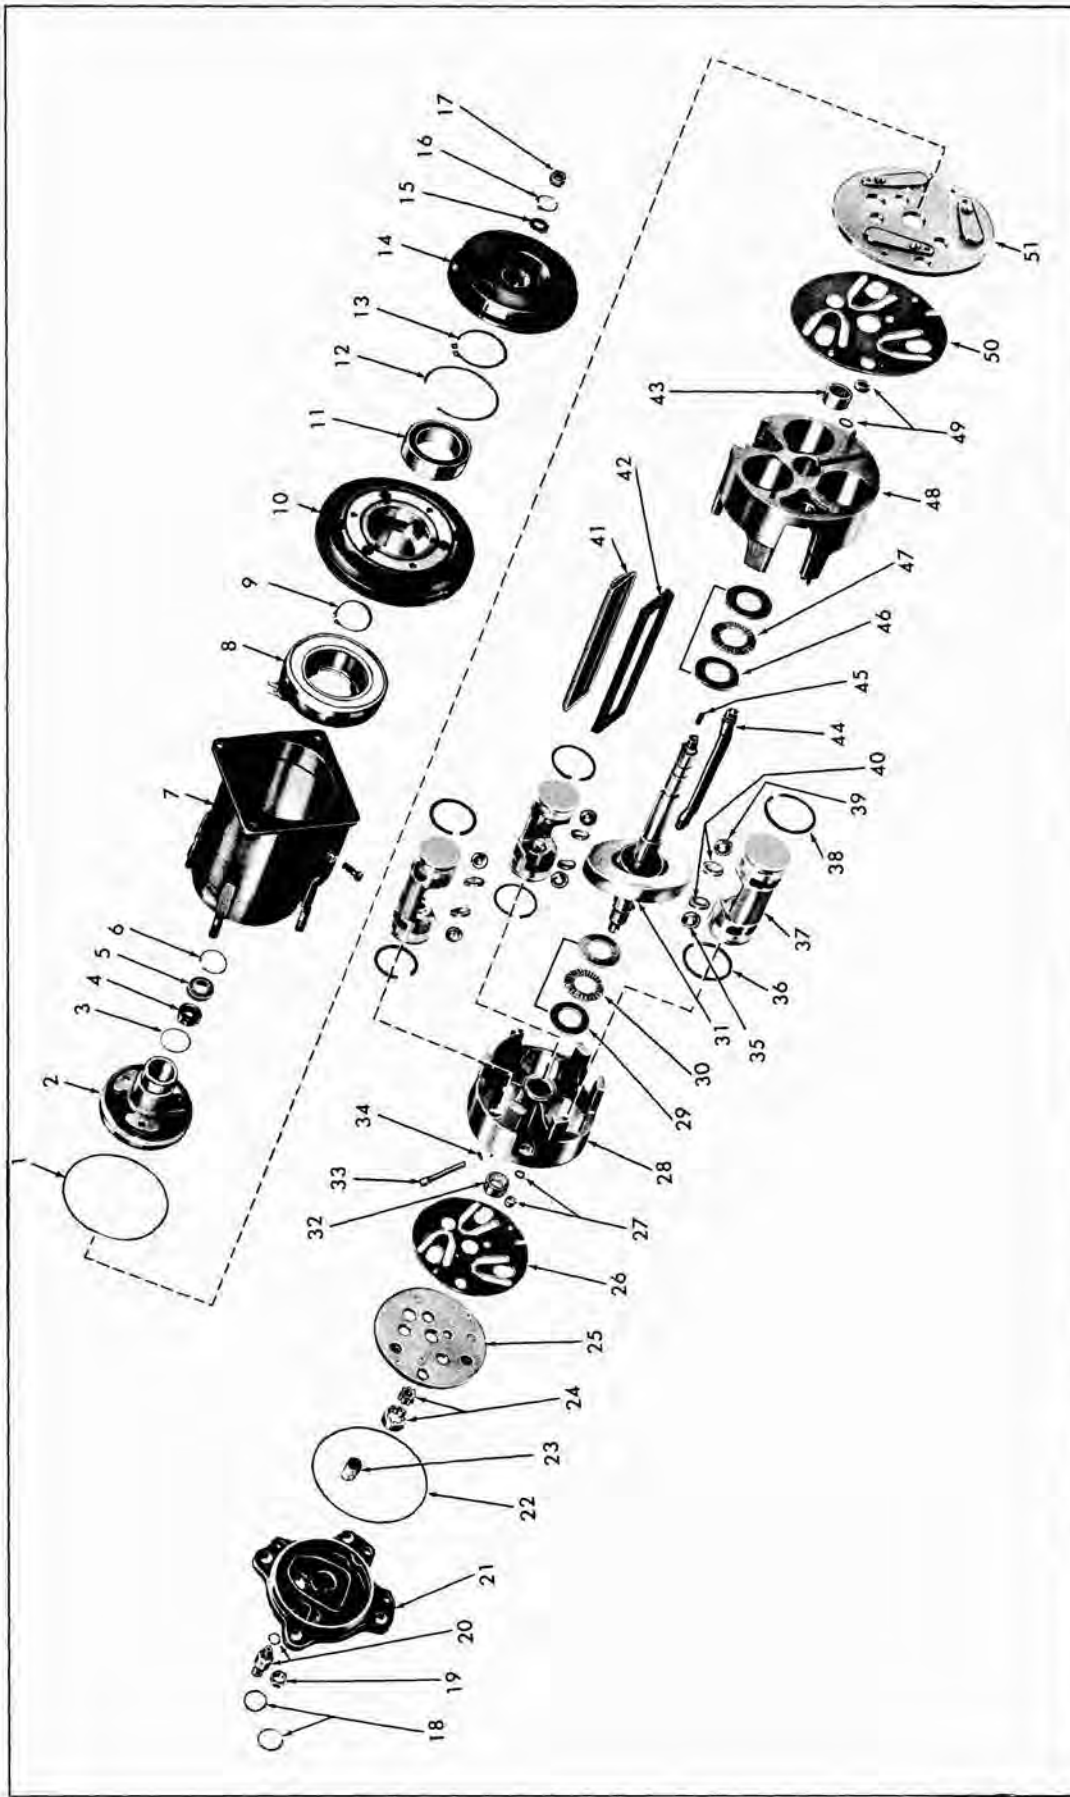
Cross Section of Six Cylinder Compressor Assembly
